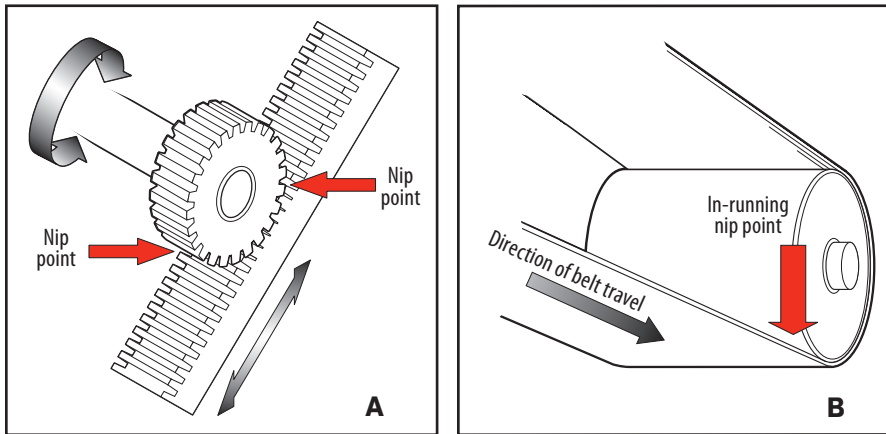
Combination of rotating and sliding parts and reversing parts, creating two in-running nip point hazards. (A) Rack and pinion gears. (B) Conveyor belt spool.
